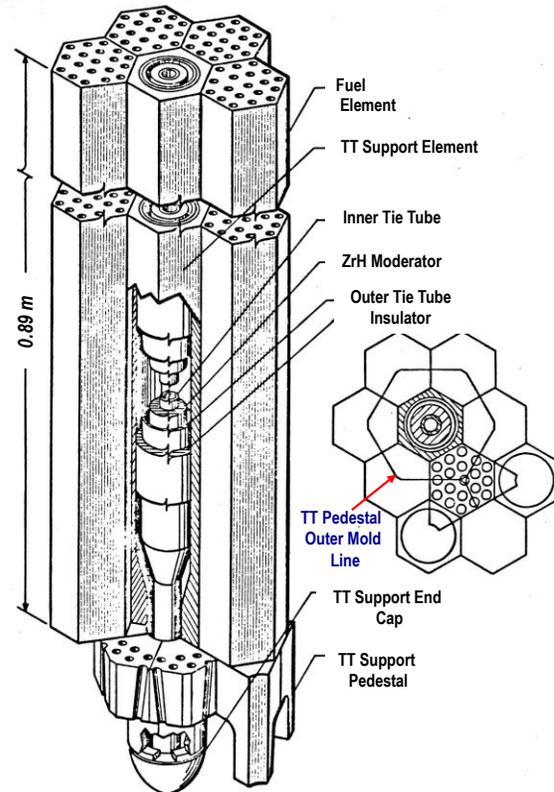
SNRE FE – TT Bundle Cutaway Showing TT Support Pedestal Features and Outer Mold Line
